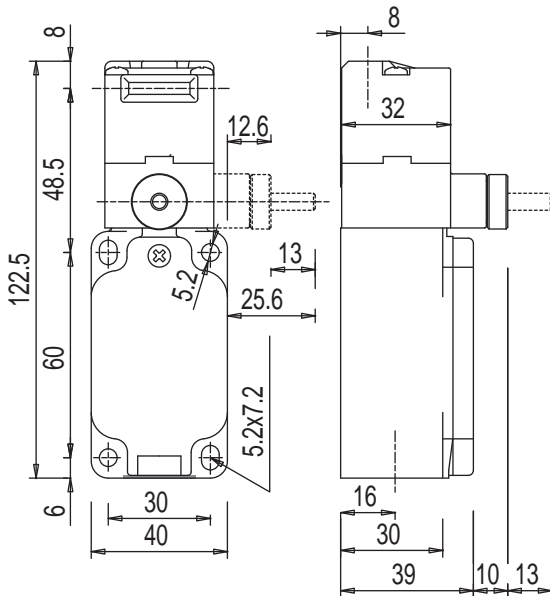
Dimensions L10-M2C1-M20-SB20 in mm
